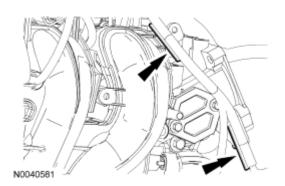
Locating Pin-Type Retainers Courtesy of FORD MOTOR CO.
